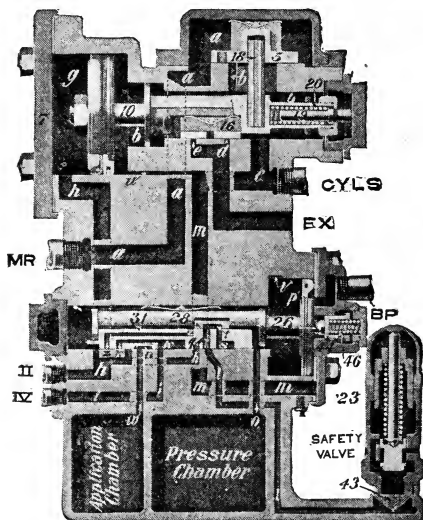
,990.—*Emergency Lap.* The movable parts of the valve remain in the position shown in fig. 1,989 until the brake cylinder pressure slightly exceeds the application cylinder pressure, when the application piston and application valve move back to the position known as *emergency lap* as shown above. The release after an emergency is brought about by the same manipulation of the automatic brake valve as that following service application, but the effect on the distributing valve is somewhat different. When the equalizing piston, equalizing valve, and graduating valve are forced to the release position by the increased brake pipe pressure in chamber *p*, the application chamber, pressure in which is zero, is connected to the application cylinder, having emergency pressure therein through port *w*, cavity *k*, and port *h*. The pressure in the application cylinder at once expands into the application chamber until these pressures are equal, which results in the release of brake cylinder pressure until it is slightly less than that in application cylinder and chamber. Consequently, in releasing after an emergency (using the release position, of the automatic brake valve), the brake cylinder pressure will automatically reduce to about 15 pounds, where it will remain until the automatic brake valve handle is moved to running position. If the brakes be applied by a conductor's valve, a burst hose, or parting of train, the movement of equalizing valve 31, breaks the connection between ports *h* and *i*, through cavity *k*, so that the brakes will apply and remain applied until the brake pipe pressure is restored. The handle of the automatic brake valve should be immediately moved to either emergency or lap position, depending upon whether the locomotive of operating a passenger or freight train, as explained on page 1,033, to prevent a loss of main reservoir pressure.
